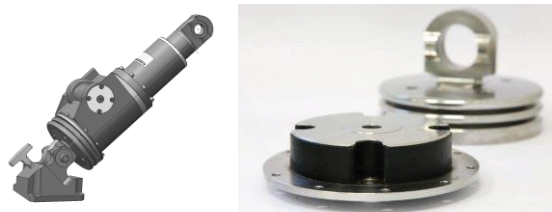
Damper module attached to the bottom of the spindle with the polymer damper element inside.
